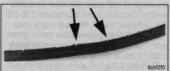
Deep cracks in this belt will cause flex, building up heat that will eventually lead to belt failure
